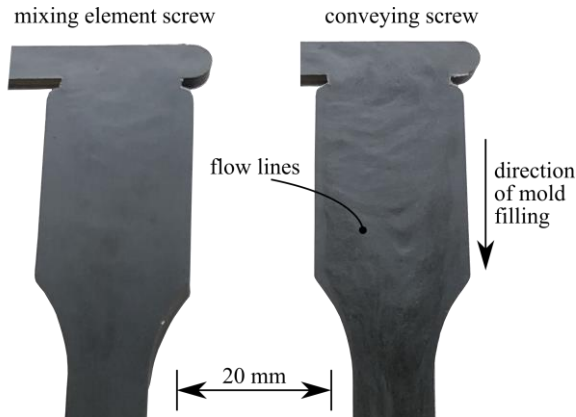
Test specimens molded with 30 mm mixing element and conveying screw
